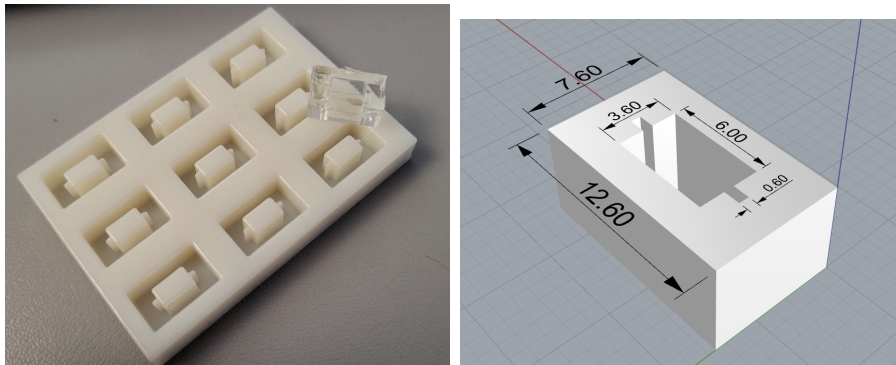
Mold and PDMS chamber (with prospective CAD view on the right)
